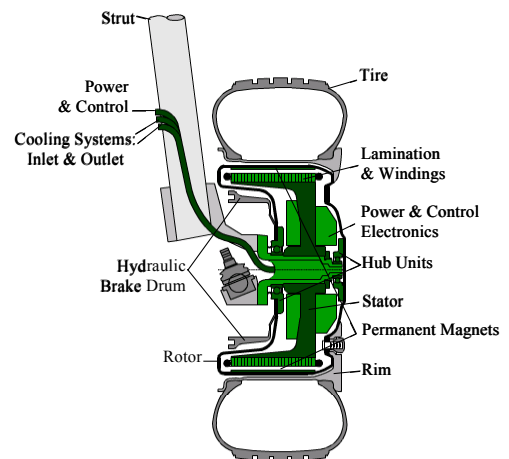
In-wheel pm brushless motor layout [© TM4].
